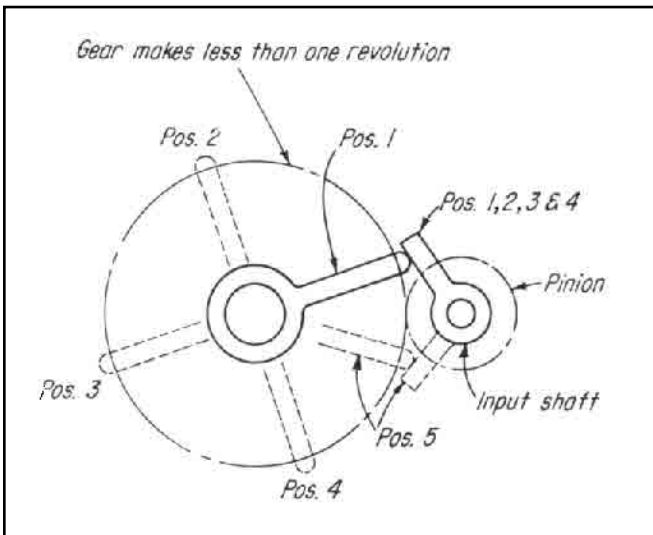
A large gear ratio limits the idler gear to less than one turn. Stop fingers can be added to the existing gears in a train, making this design the simplest of all. The input gear, however, is limited to maximum of about five turns.
